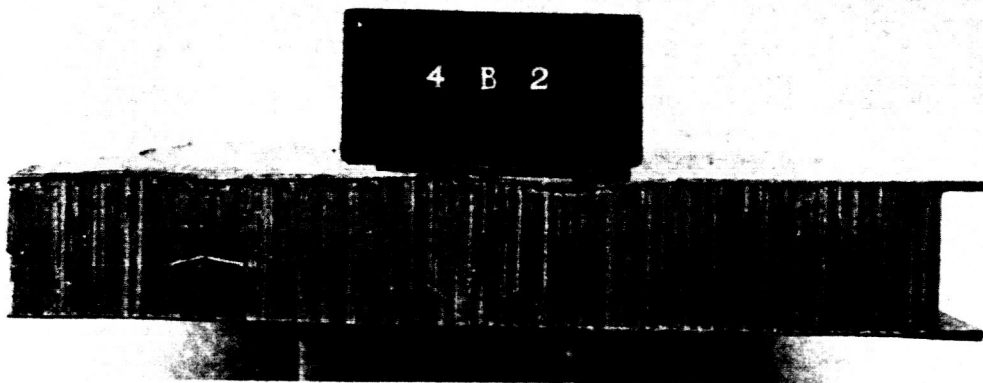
Sectional view 4H2 of aluminum-plate honeycomb-core panel after hailstone impacts
